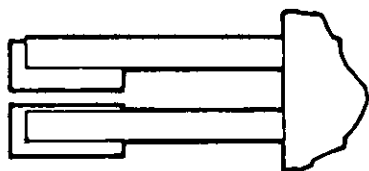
COLD OR UNDER-HEATED SOLDER JOINT
